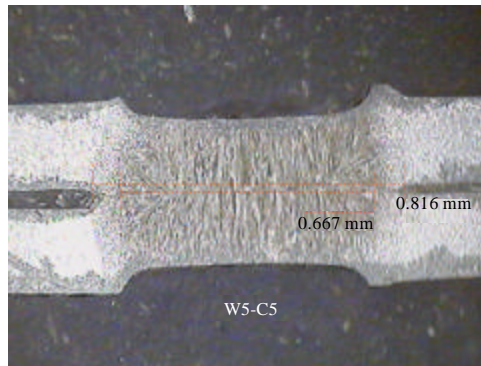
The macrograph for two sheet layers using 5.0 kA weld current (dimension measured with 5X magnification)
